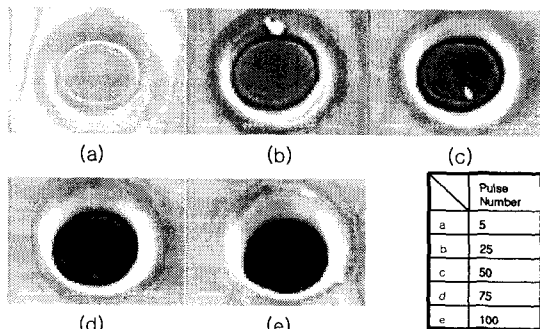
Drilled surface of PC (3.1J/cm², 25Hz)
